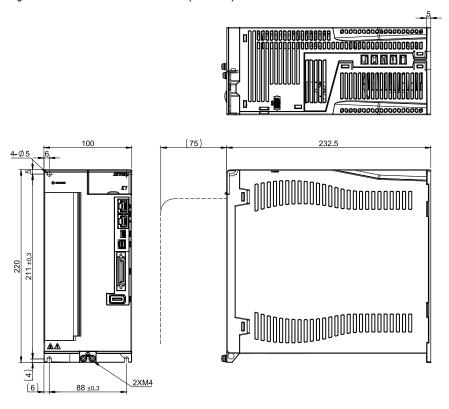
The dimensions of 2 kW servo drive (Fieldbus)
